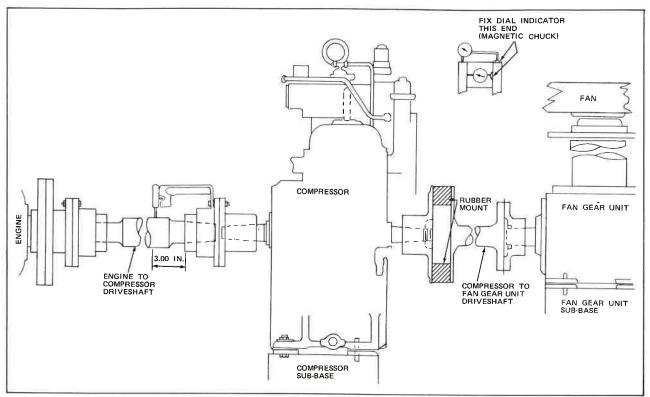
ENGINE, COMPRESSOR AND FAN GEAR UNIT ARRANGEMENT.
